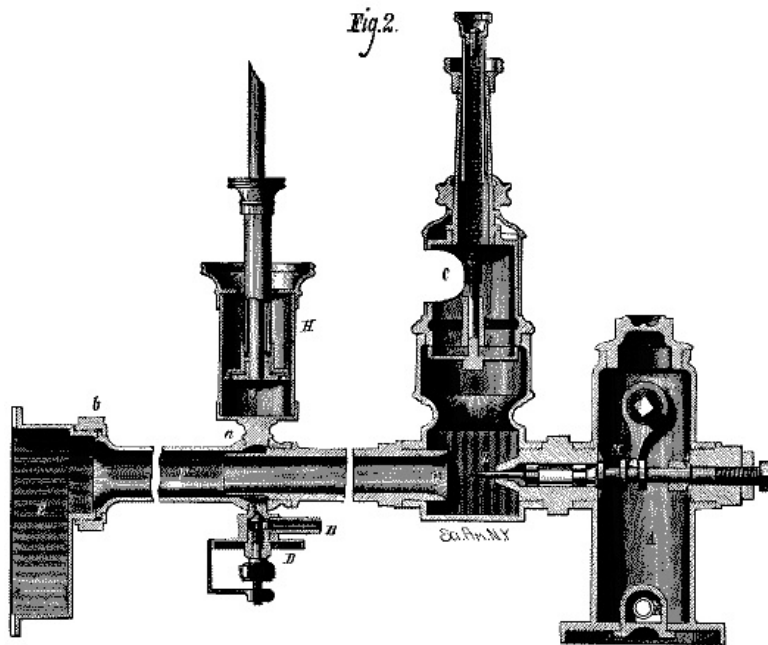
MAXIM'S GAS MACHINE—SECTION OF INJECTOR
